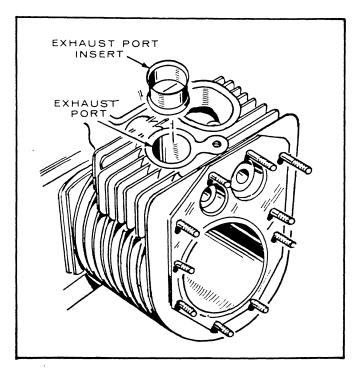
EXHAUST PORT INSERT (BEGIN SPEC C)
